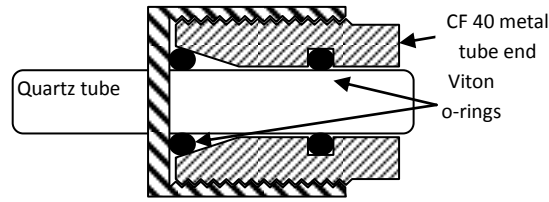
The glass to metal connection, indicating the positions of the viton o-rings.
